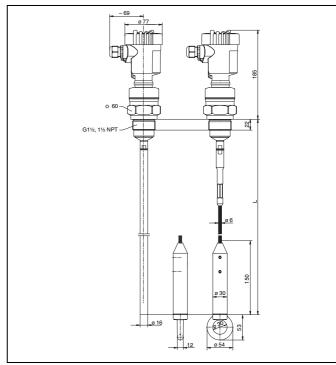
VEGAFLEX 62 - cable and rod version with thread
